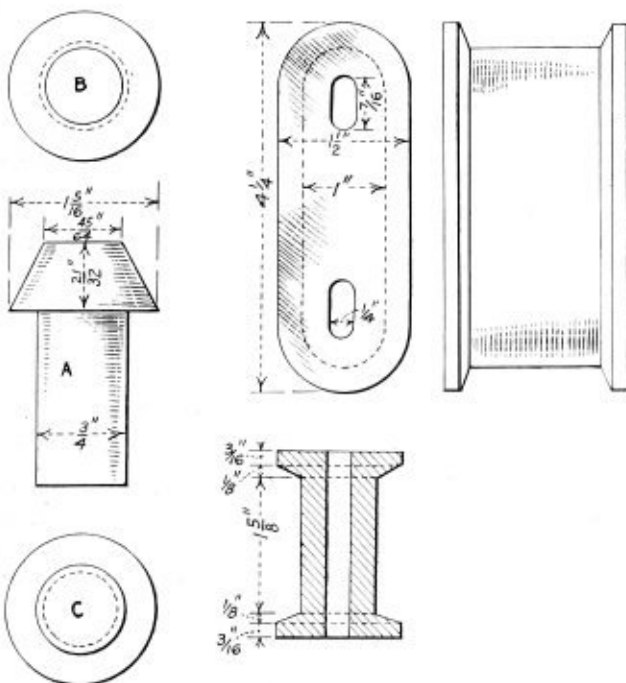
$\frac{3}{4}$ -Inch Cone Head Rivet
